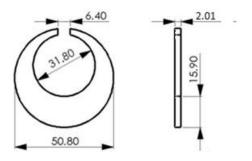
Geometry and dimensions of C-ring (all dimensions in mm)
